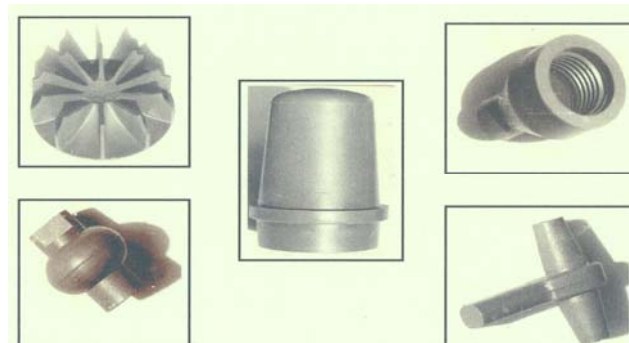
Some manufactured parts realized by powder injection molding, used in the extractive industry [4]
